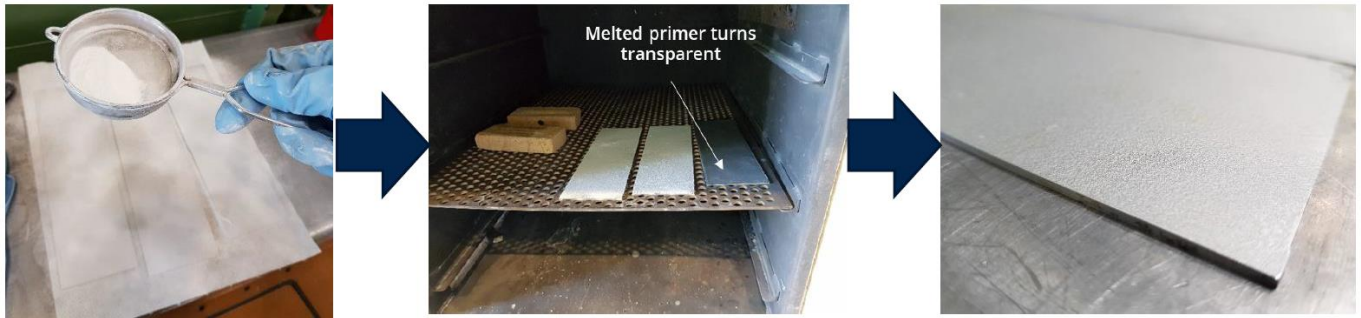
Steps for coating Vestamelt Hylink onto Aluminum plates (left to right): Even distribution of primer on metallic surface; Heating in oven; Coated Aluminum plate
